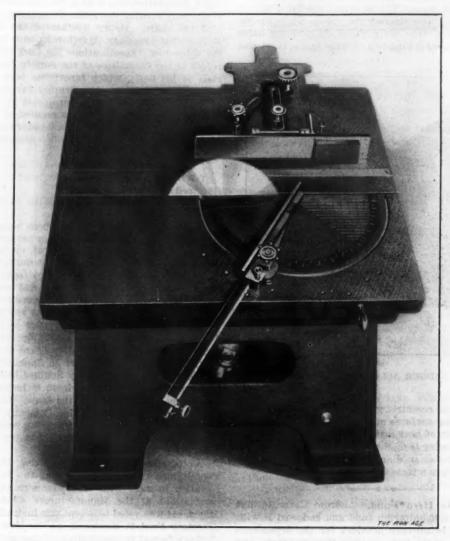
View from One Side with Table Tilted, Showing the Arrangement of the Gauges.
